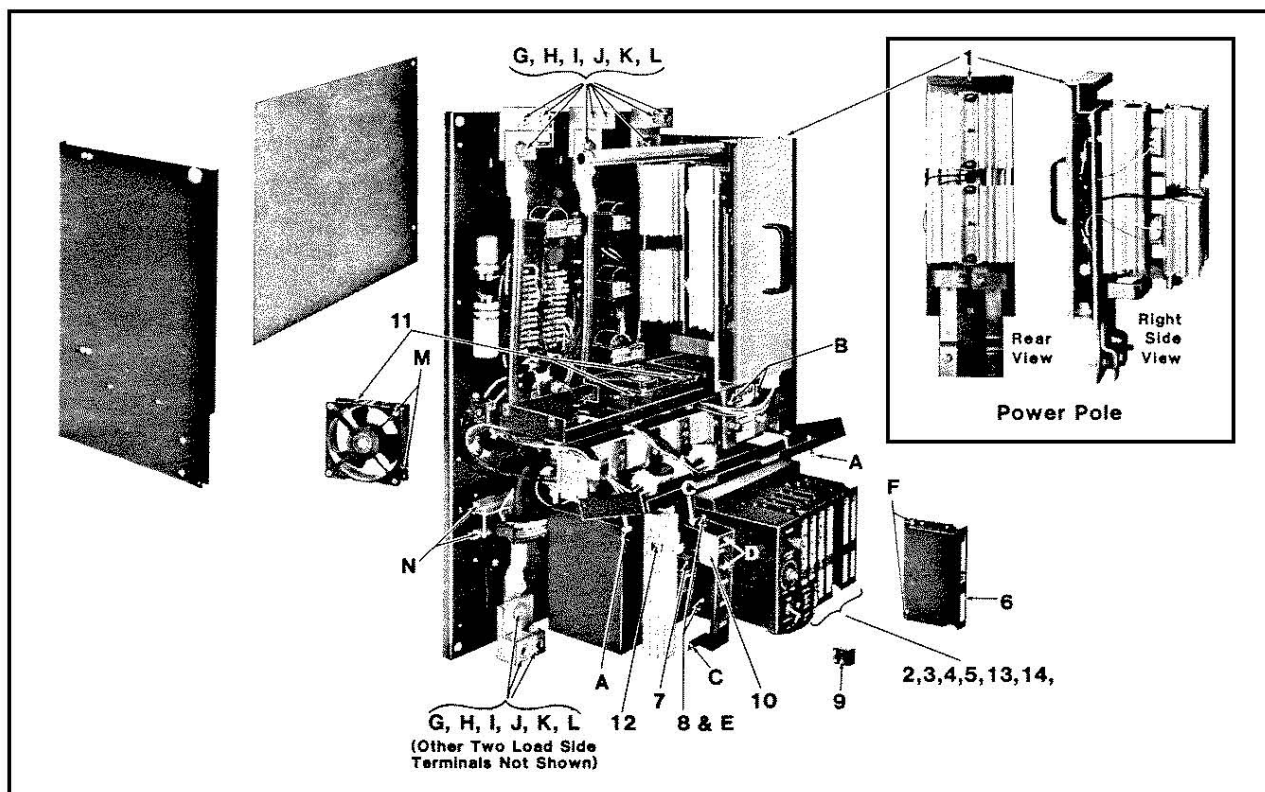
Exploded View of Small Frame Size. Large Frame Similar.
